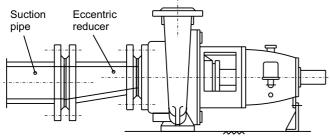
Standard arrangement of pump with eccentric reducer
